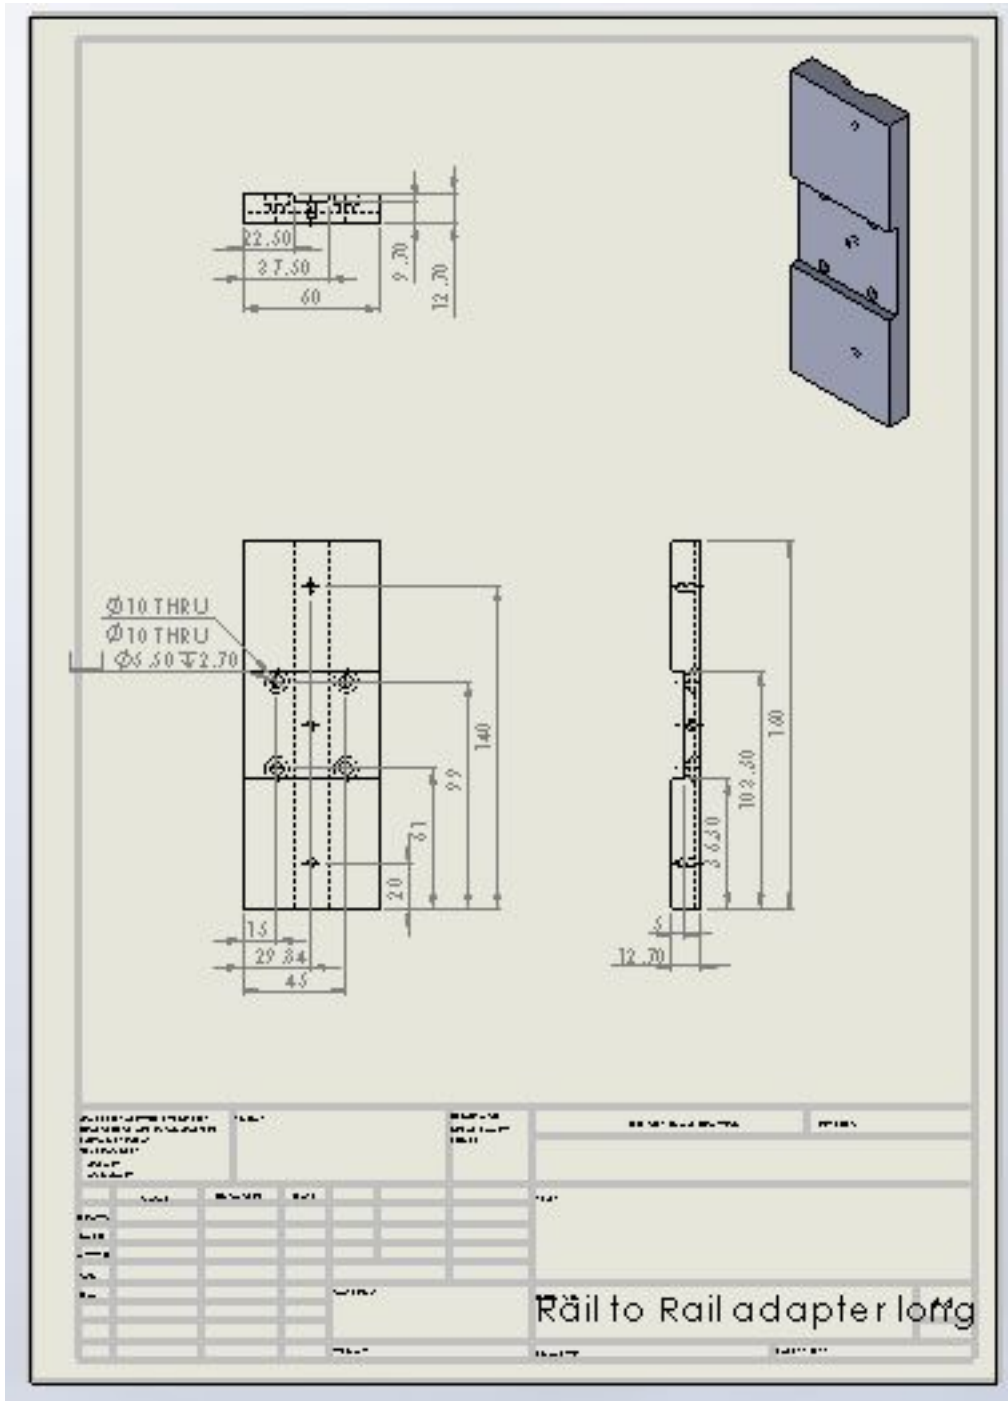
Dimensioned drawing of rail to rail piece for trapezium attachment fixture.
